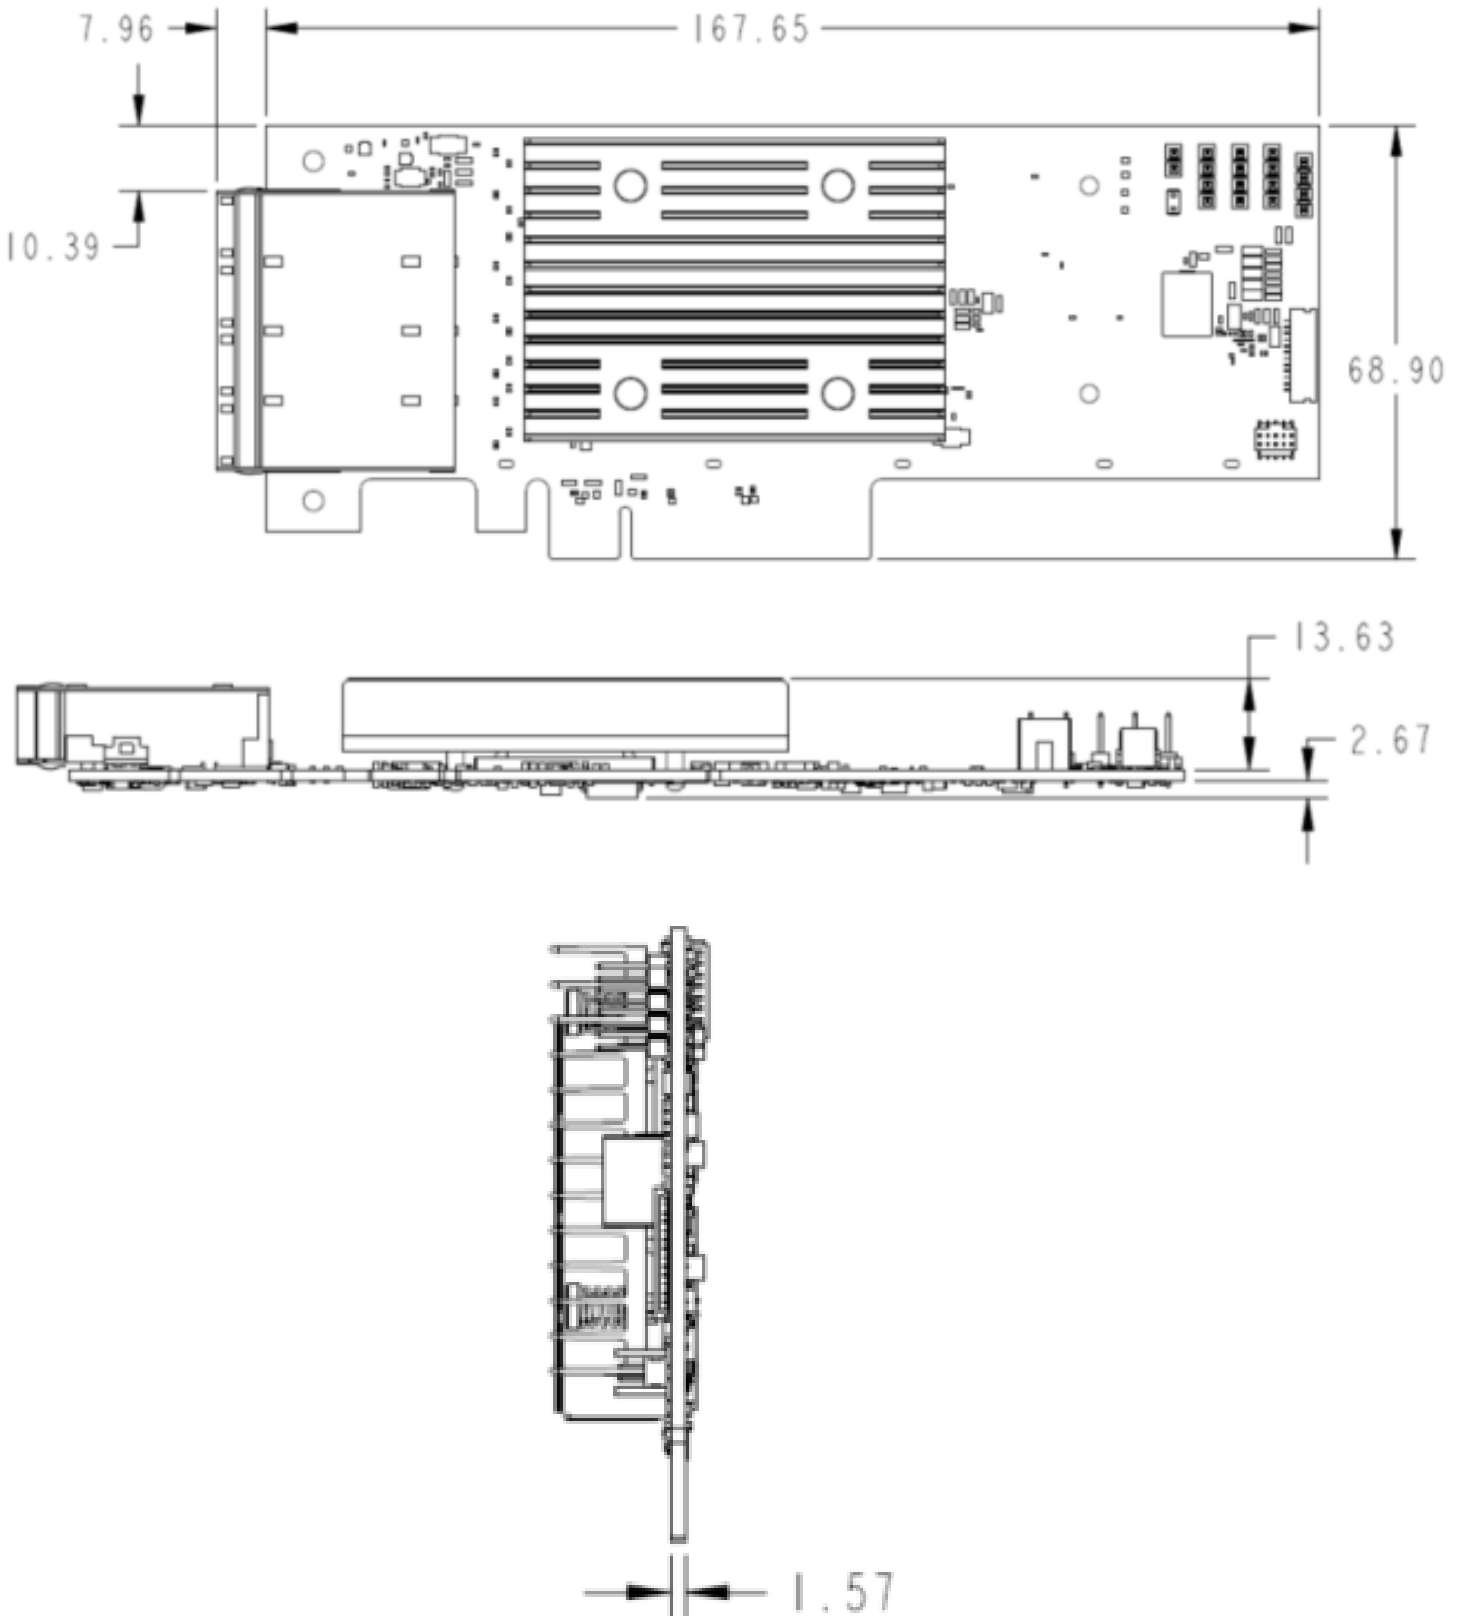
Intel® Storage Adapter RS3P4GF016J Dimensions
